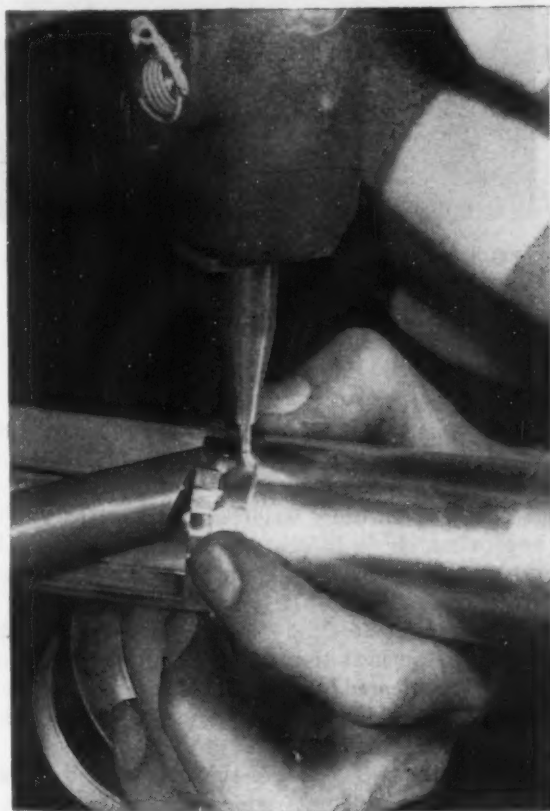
Berylco spring clamp for the end of the iris opening is welded using a stored energy of 2600 v at 240 microfarads. Two are used on each assembly.
